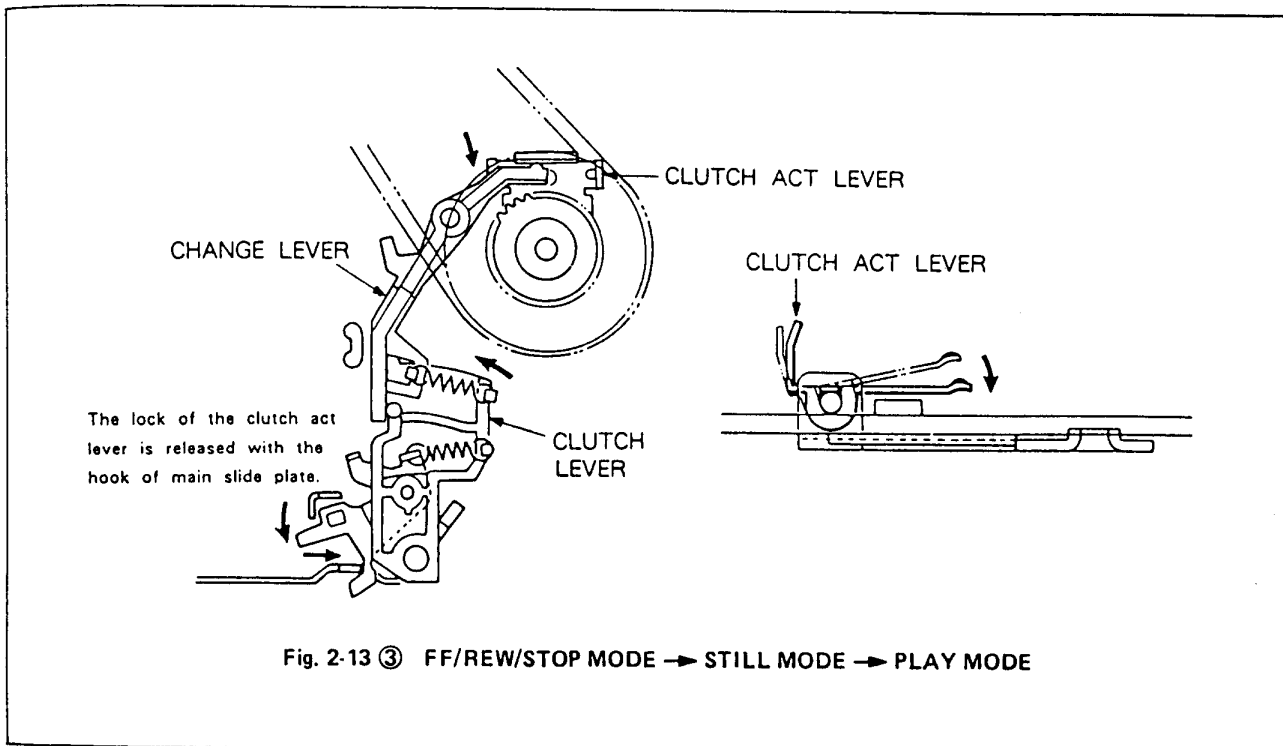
① - ③ REEL TABLE DRIVE CLUTCH LOCK AND RELEASE MECHANISM
